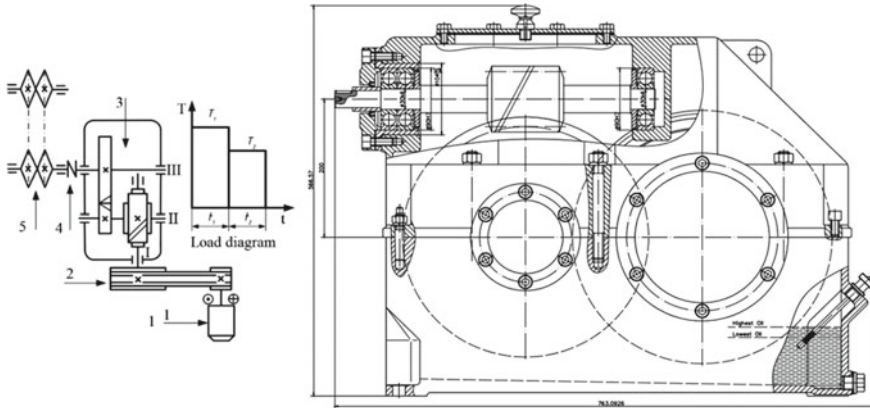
Kinematic scheme and front view drawing of two stage worm-spur gear
